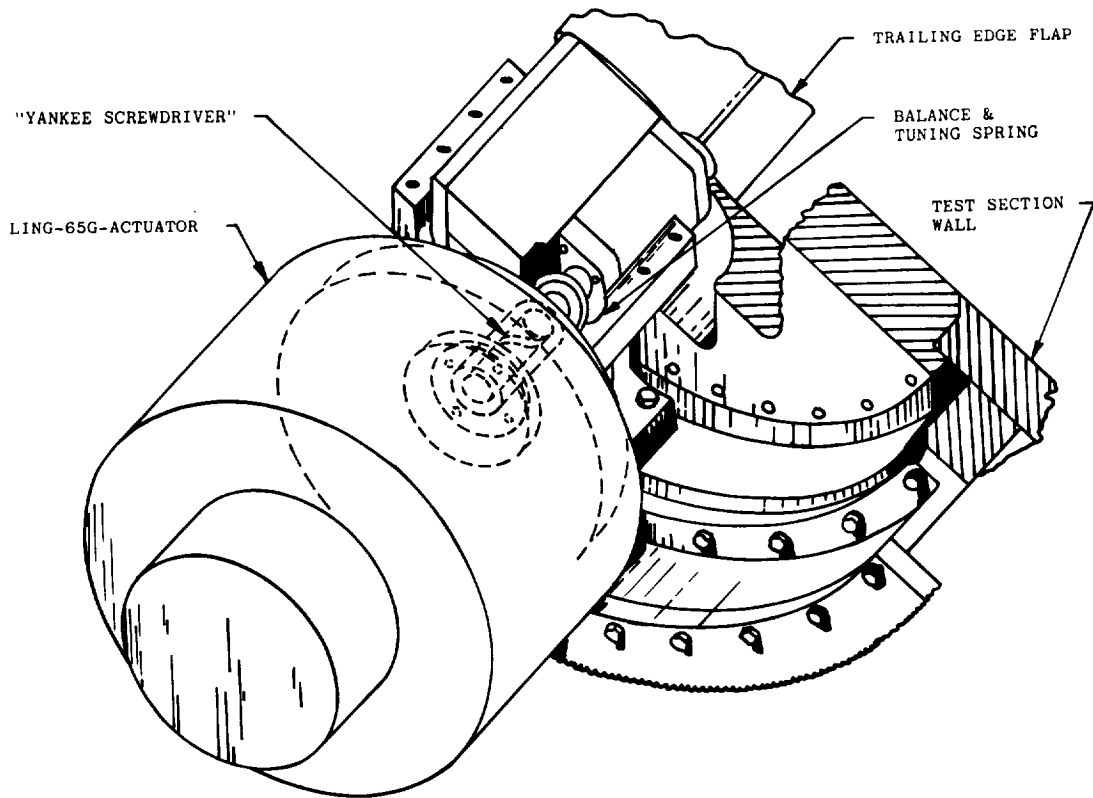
SURFACE ACTUATOR AND MECHANISM ARRANGEMENT
